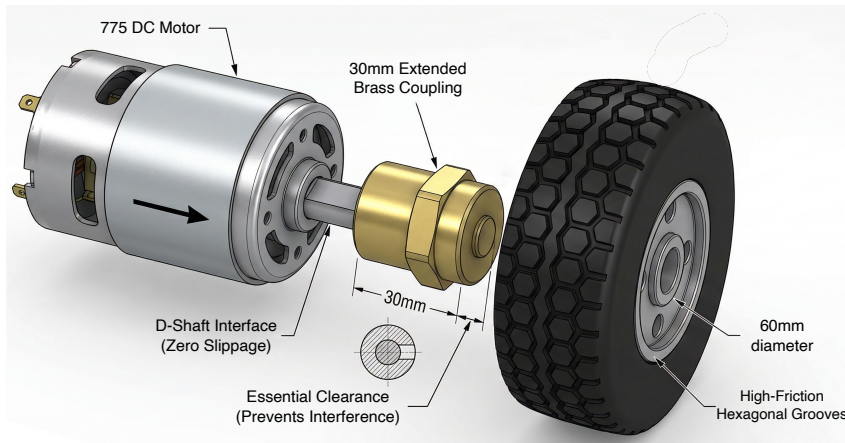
Close-up view of the mechanical coupling. The 30mm extended brass coupling provides critical operational clearance between the 775 motor casing and the high-friction intake roller.
